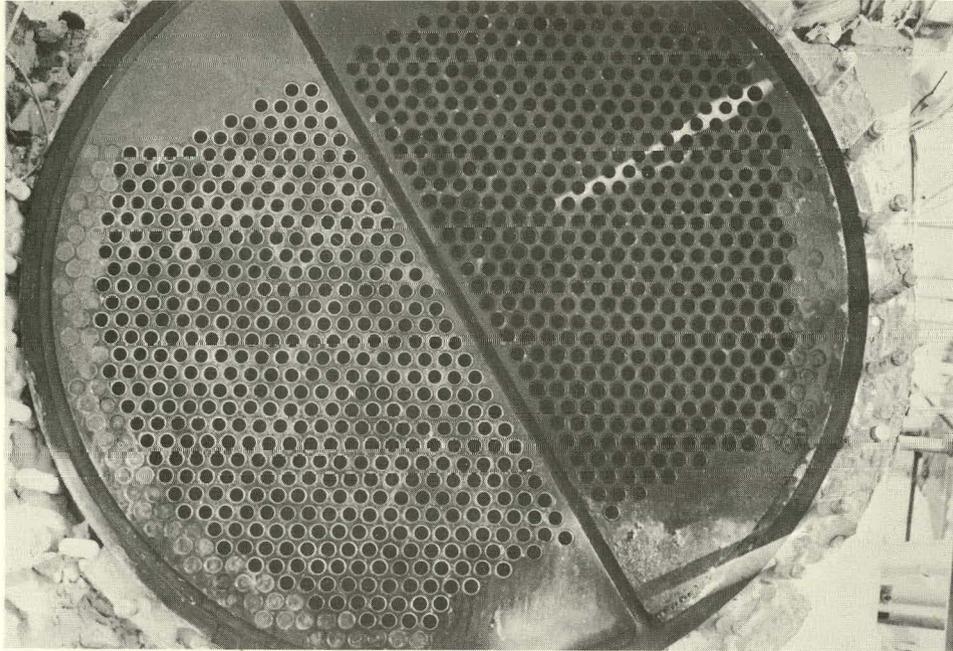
Appearance of Tube Sheet and Tubes on Melter-Condenser. Note tube sheet plugs to allow for installation of floating head on opposite end of condenser.
